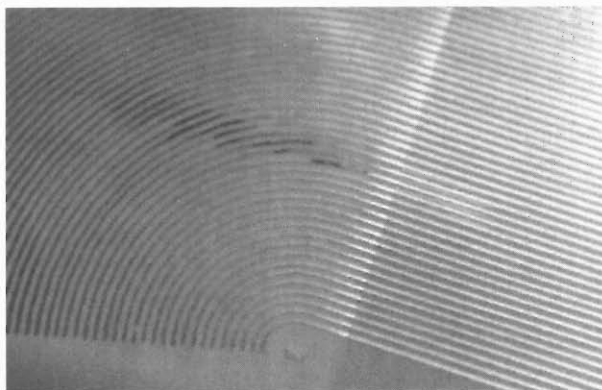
Printed circuit fabricated on a polyimide film. Nozzle part of the rf ring electrode was formed by folding this print pattern.
